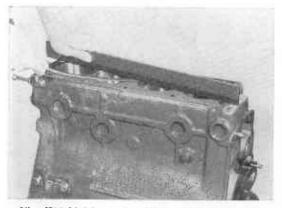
Measuring Flatness of Cylinder Block Surface
